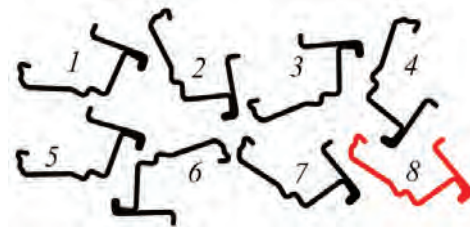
Variants of location of the doorpost profile cross-section in the drawing or in the roll-forming machine finishing stand
